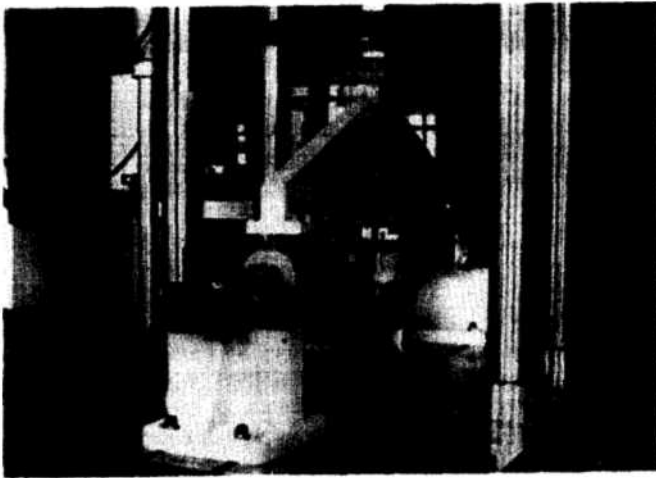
Four point bending fatigue test setup for a rear axle housing with the structural fatigue testing machine developed.
